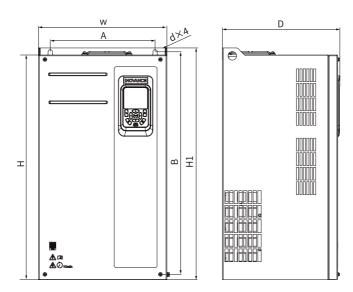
Outline dimensions and mounting dimensions of T7 to T9 models
